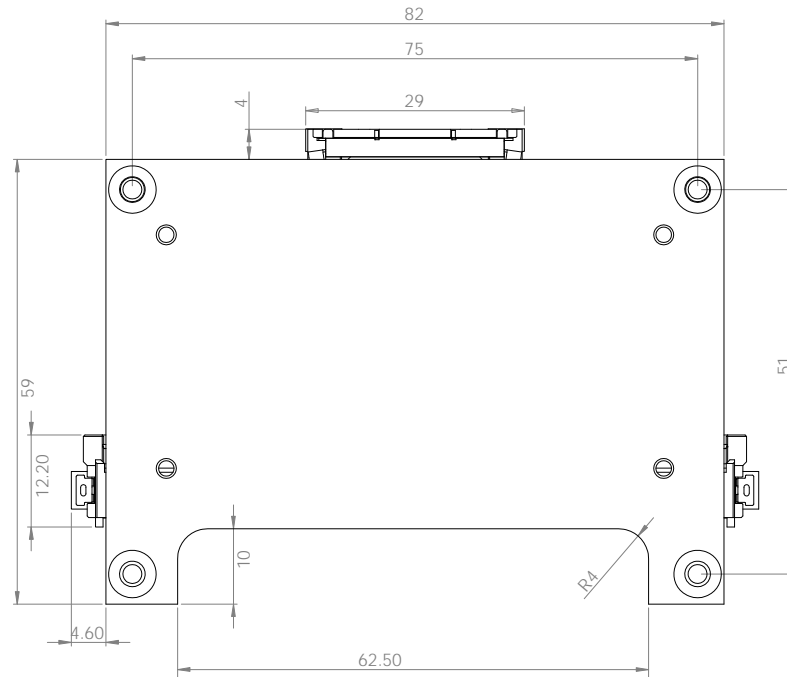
Maximum carrier board space requirement (dimensions in mm)
